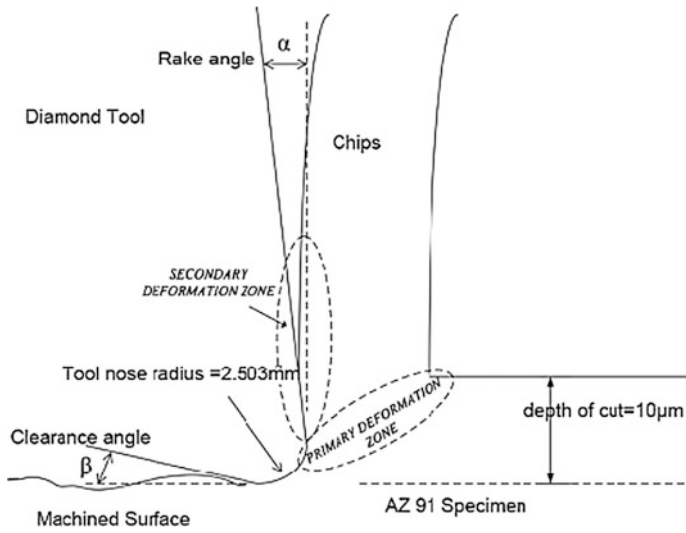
Side view of chip morphology and principle of straight cutting
